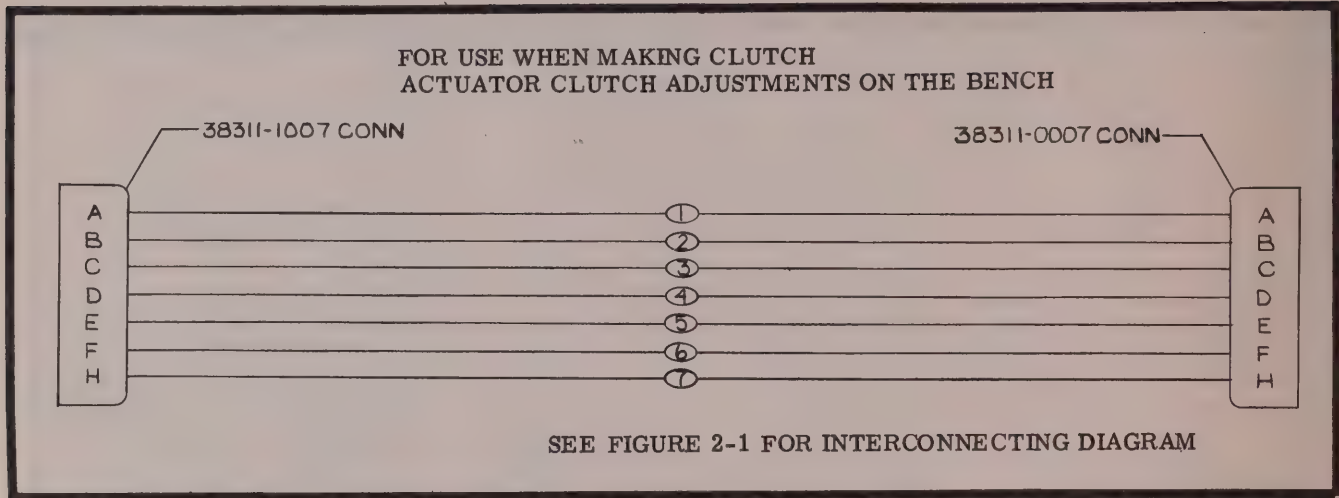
9799007 PA500A Actuator Adapter Cable Assembly
